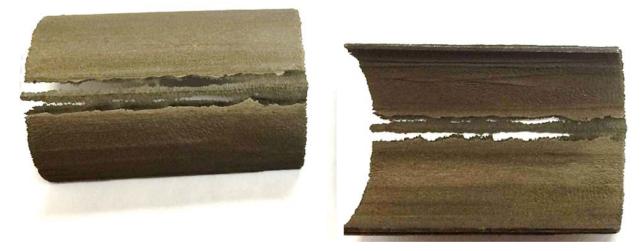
Results of ASTM A249/S7 weld decay corrosion test of the 1.00" elbow. Most of the longitudinal weld in this sample was consumed during the test. The OD surface is shown at left and the ID surface is shown at right.
